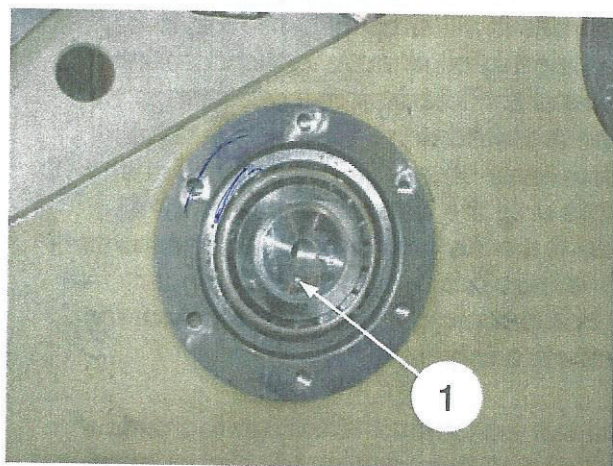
Showing the puller hole in the end of the eccentric sprocket shaft and the 1/4" identification hole [1]. The tube used with the puller must clear the outside diameter of the bearing.
